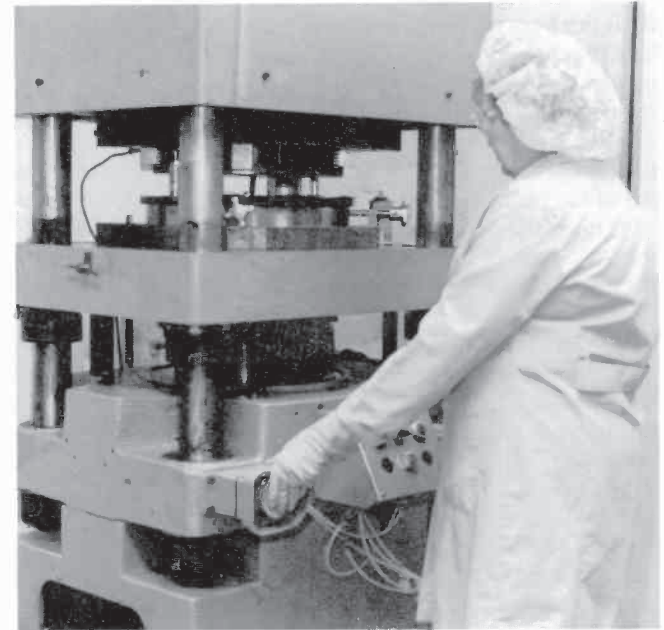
Coining die. The mechanical profile of the inner and outer edges of the stamper is formed in a coining operation. The forming allows a match between the stamper and the press-mold geometries.
